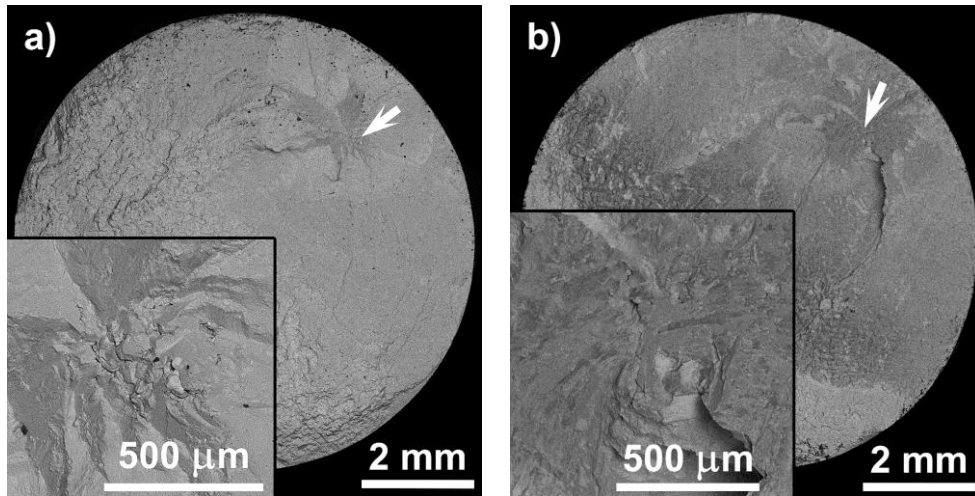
Fracture surface of the specimen of B1914 superalloy after cycling at 900 °C.
